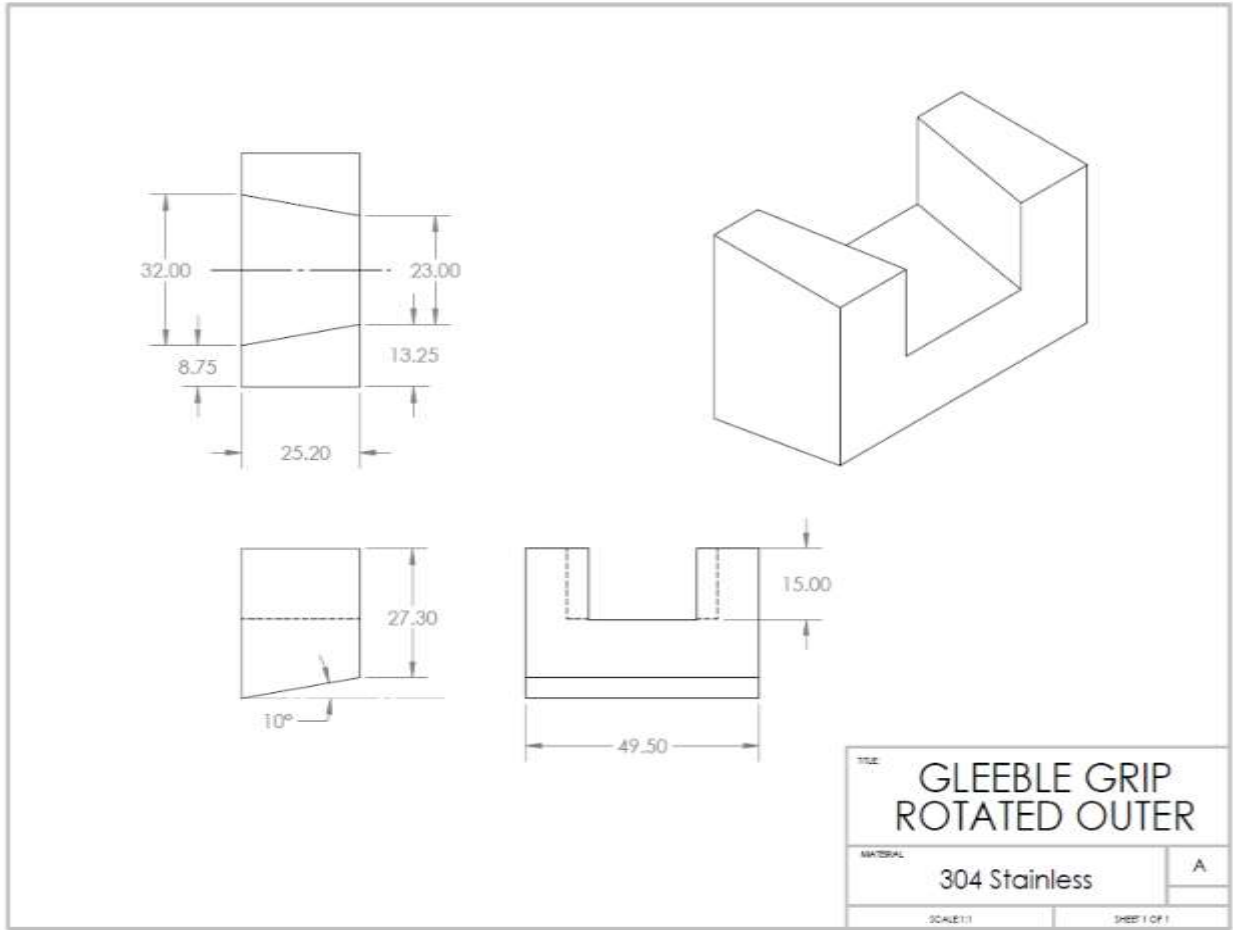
Drawing for the outer set of grips for rotating the orientation of the tensile specimen
